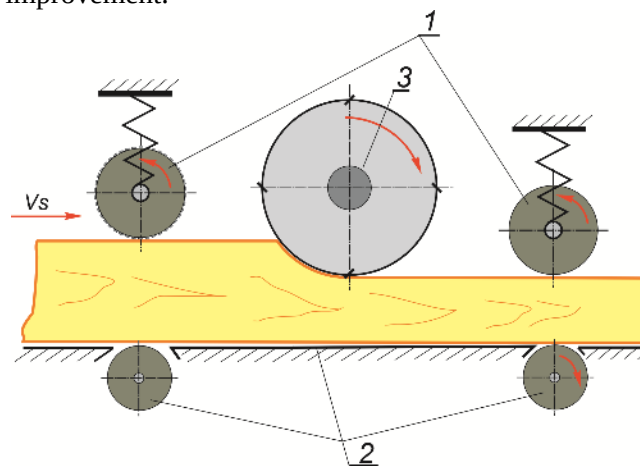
Schematic diagram of a planer machine: 1 – workpiece feeding mechanism; 2 – basing mechanism; 3 – cutting tool.
